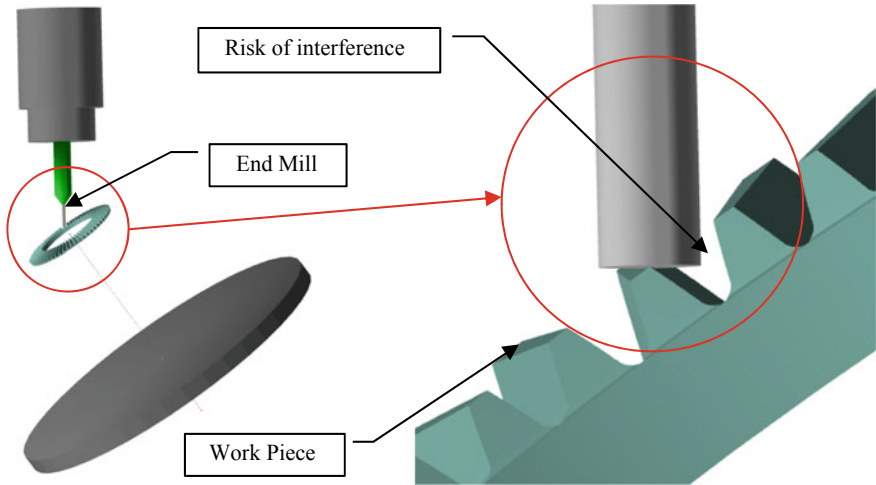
Tip chamfering of a large pitch cone angle bevel gear—EM tool tip is used
